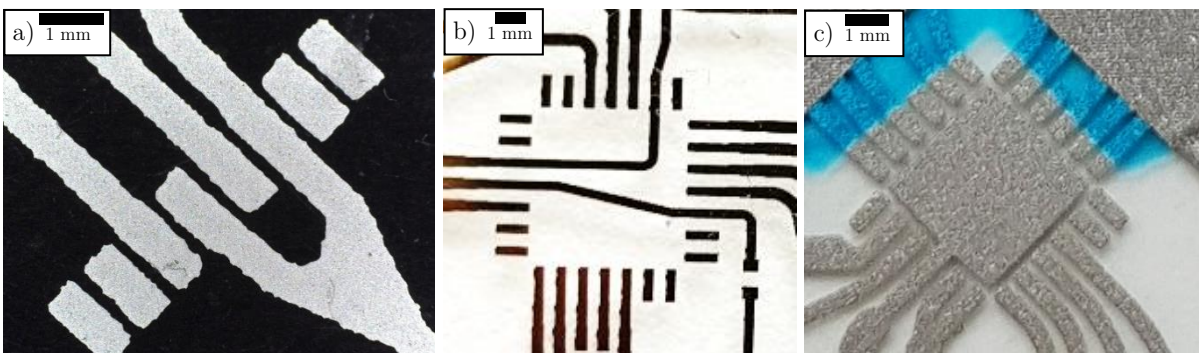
a) An optical microscope image of screen-printed pads, b) a photograph of an inkjet-printed footprint, and c) a photograph of contact pads for surface mount ICs.
